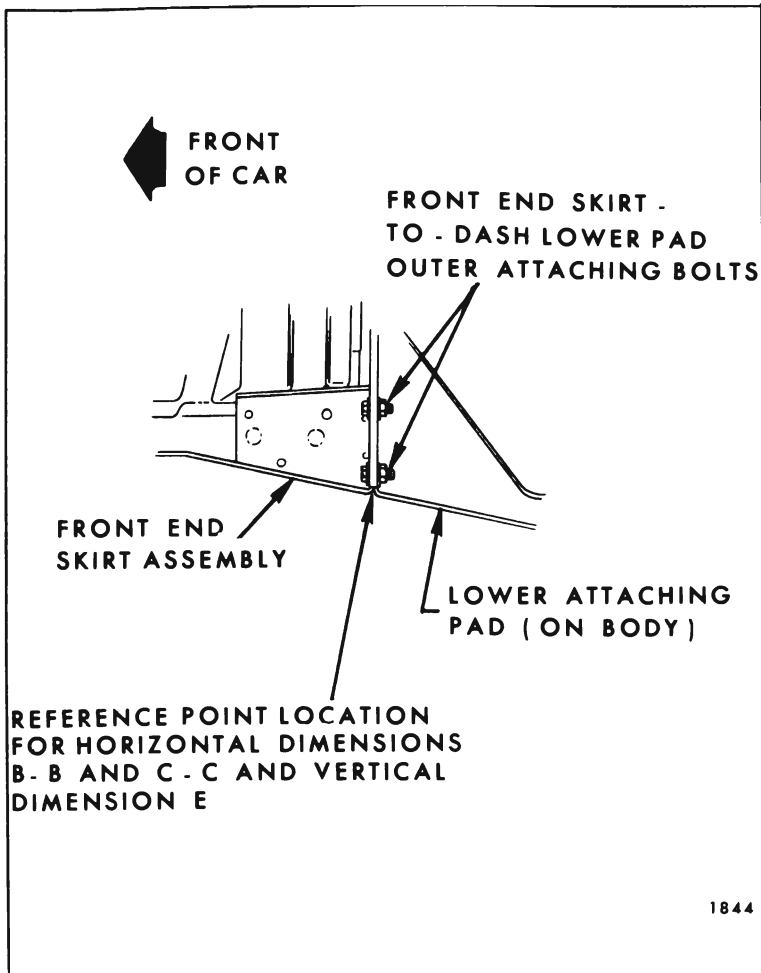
Front End Skirt-to-Dash Lower Attaching Pad
